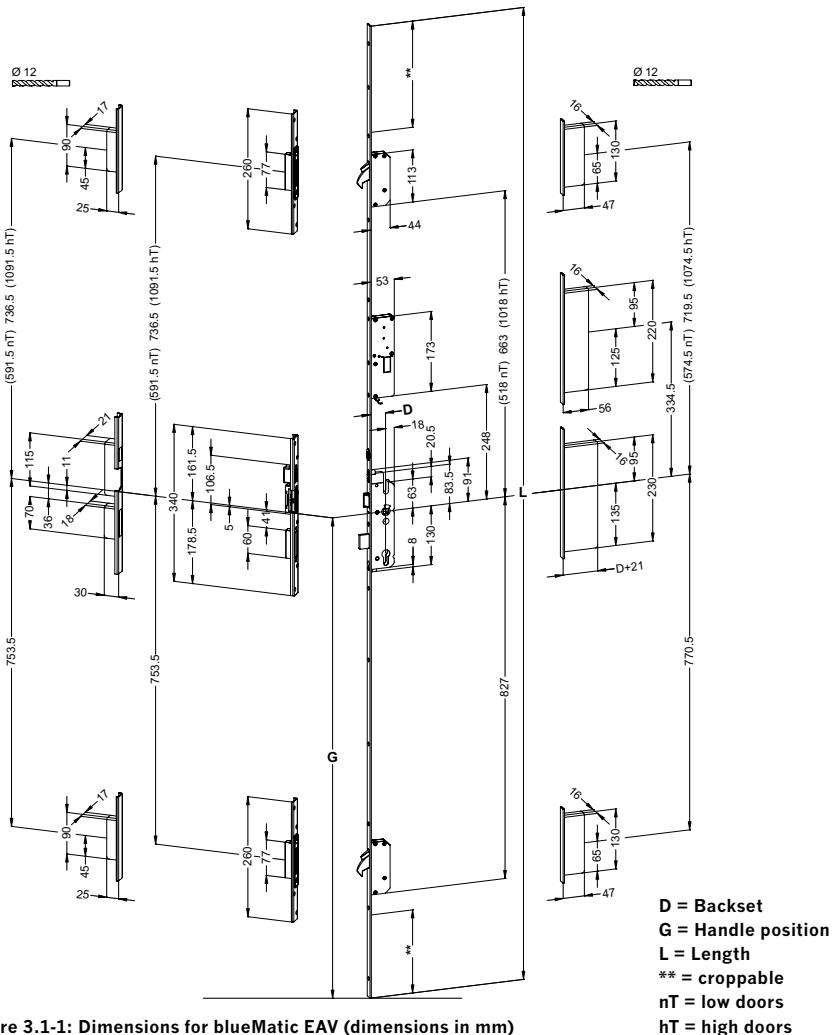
Dimensions for blueMatic EAV (dimensions in mm)
